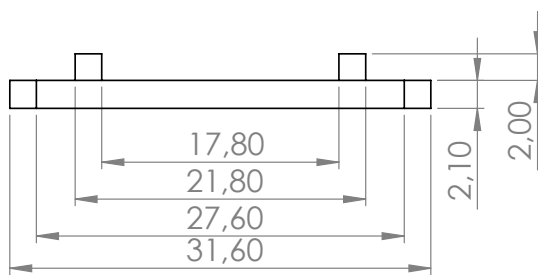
Magnetometer holder side plate, top view. Indent of 2 mm not visible.
